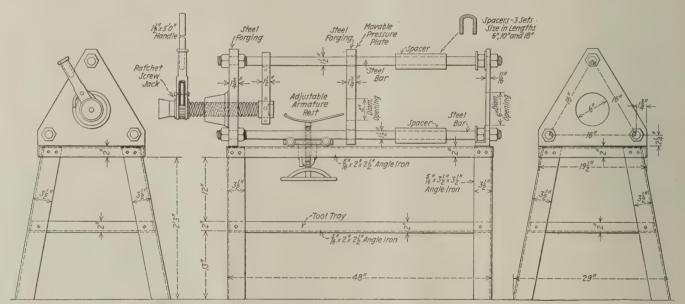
Drawings Showing Dimensions and General Arrangement of Parts of the Armature Press
